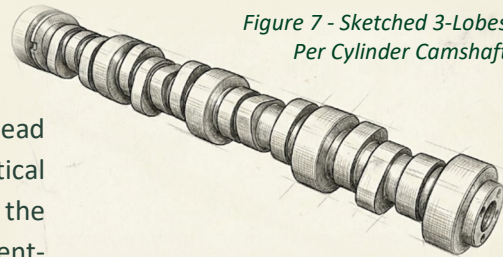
Sketched 3-Lobes Per Cylinder Camshaft
